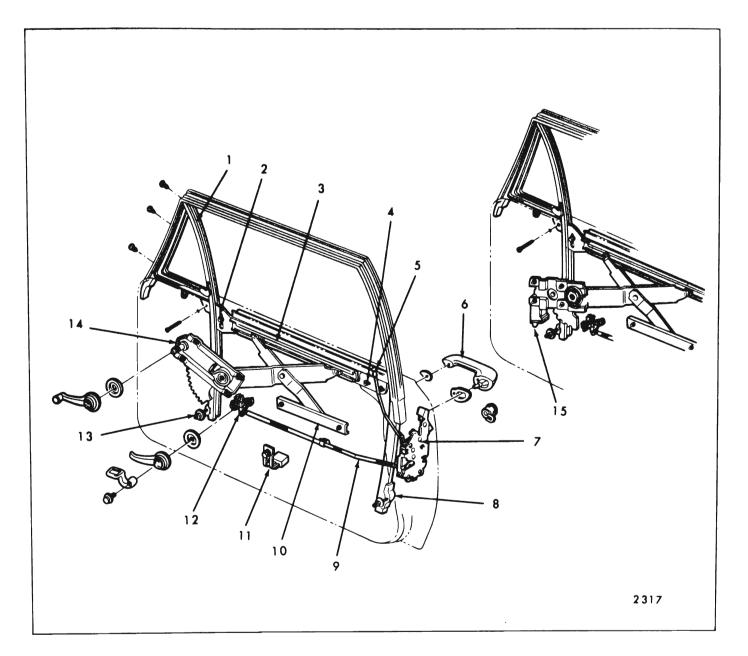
Front Door Hardware - "A-07" Styles
